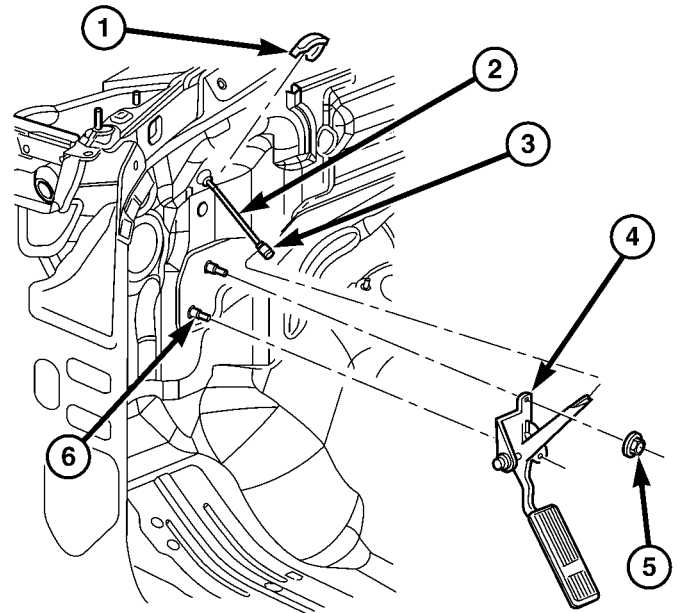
ACCELERATOR PEDAL/BACKET ASSEMBLY
